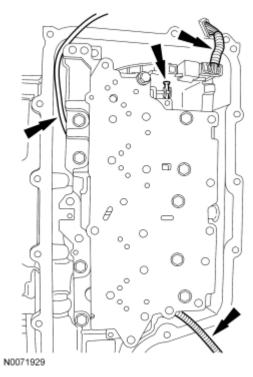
Locating TSS, OSS & TR Sensor Wiring Harnesses Courtesy of FORD MOTOR CO.
